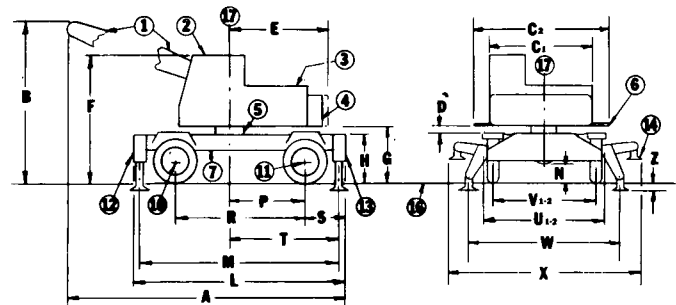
WHEEL MOUNTED, SINGLE OPERATOR STATION
